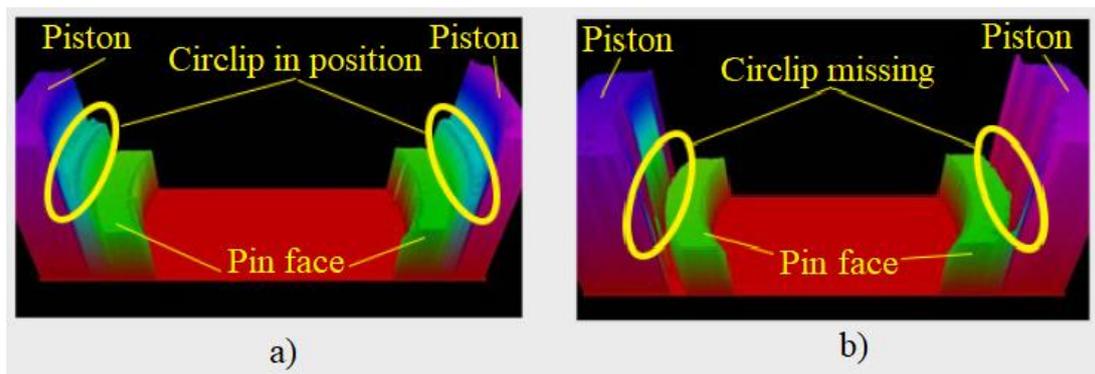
Result of 3D inspection of the snap rings assembly: a) circlip in position; b) circlip missing
